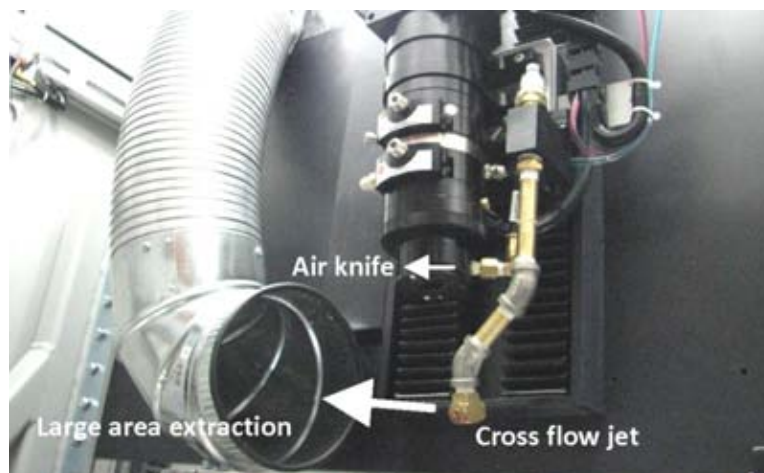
Cross jet reduces particulate beam blocking for multi kilowatt welding
